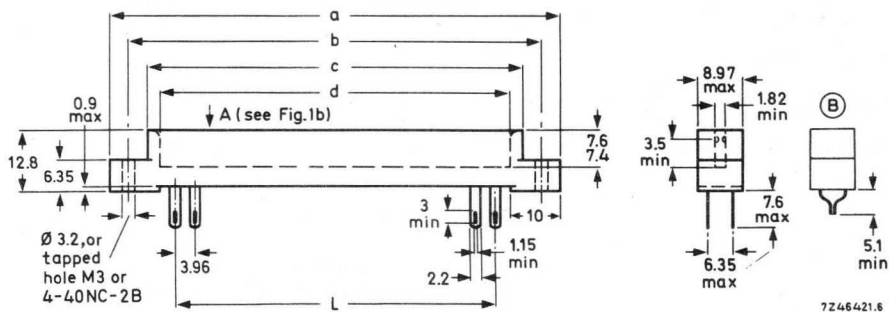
Outline drawing of a double sided connector with insert (B) for type with bridged opposite terminations.
